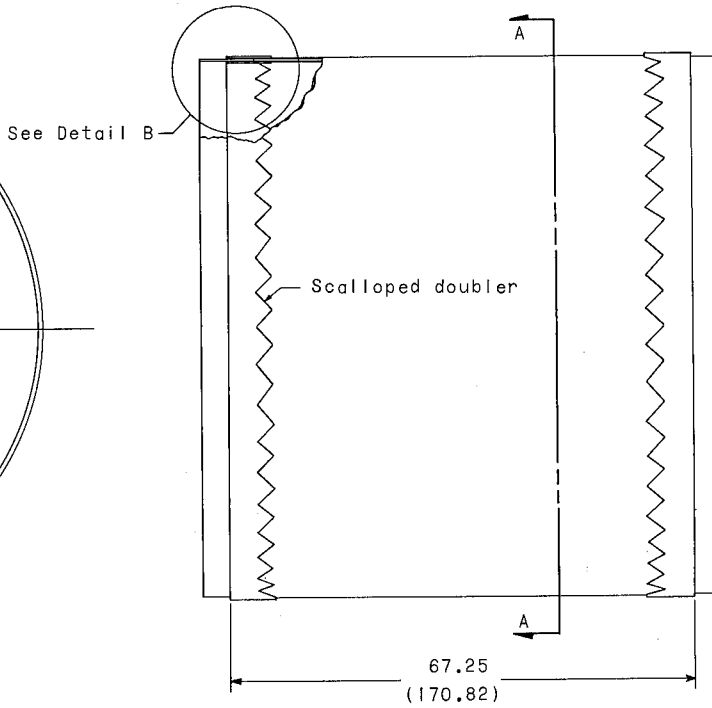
Construction details of test cylinders. All dimensions are in inches. (Parenthetical dimensions are in centimeters.)
